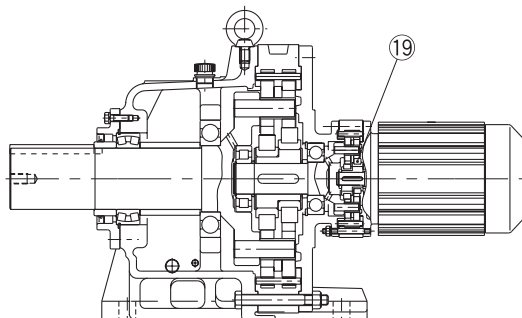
Type CHHM (Horizontal, Gearmotor)
